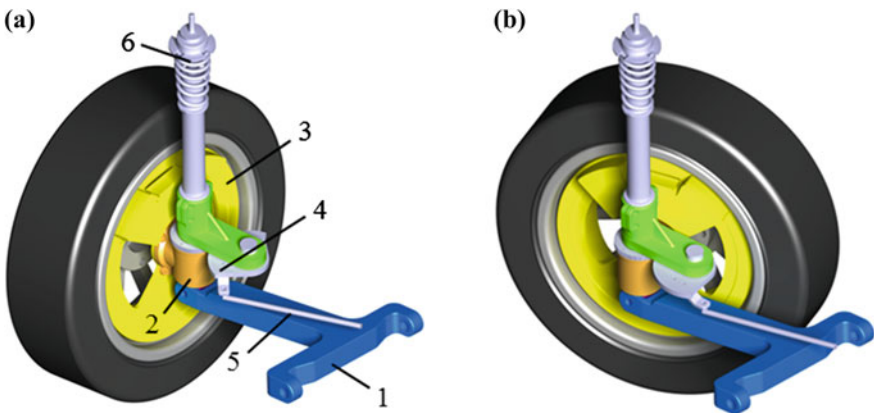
Front suspension assembly in a straight line and b 85° steering condition
